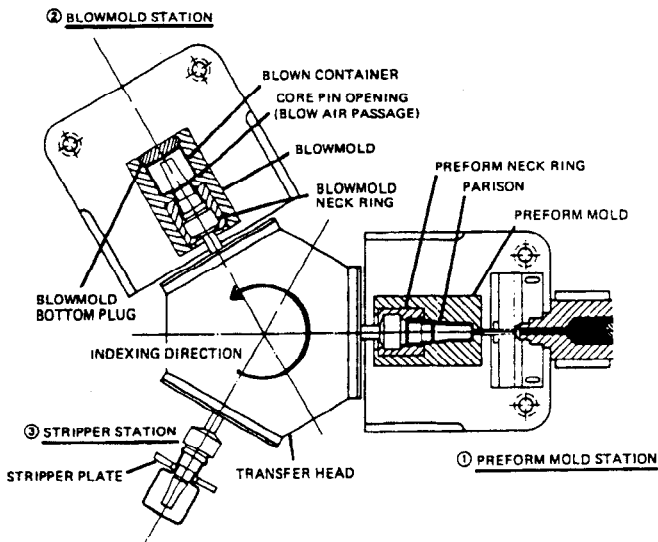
Three Station Injection Blow Molding Machine [Miller, 1983]. The parison is injection molded on a core pin (instead of as a tube in free air, as with extrusion blow molding) at the preform mold station (1). The parison and neck finish of the container are formed there. The parison is then transferred on the core pin to the blow mold station (2) where air is introduced through the core pin to blow the parison into the shape of the blow mold. The blow container is then transferred to the stripper station (3) for removal.
